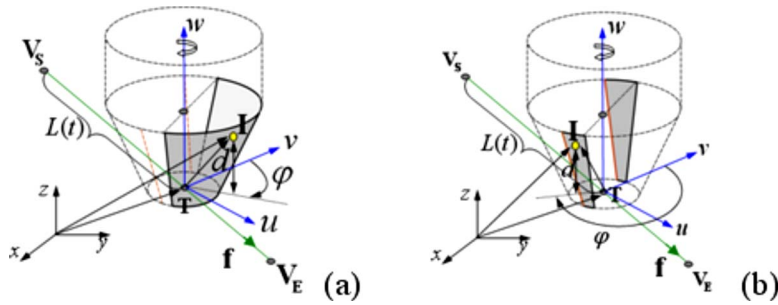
Engagement regions of the (a) front and (b) back contact faces for the tapered flat end mill
